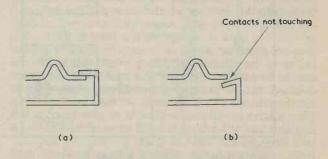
(a). The rear ends of the contacts of the jack socket before modification (b). One of the contacts is bent so that the two contacts only make when the jack plug is inserted
